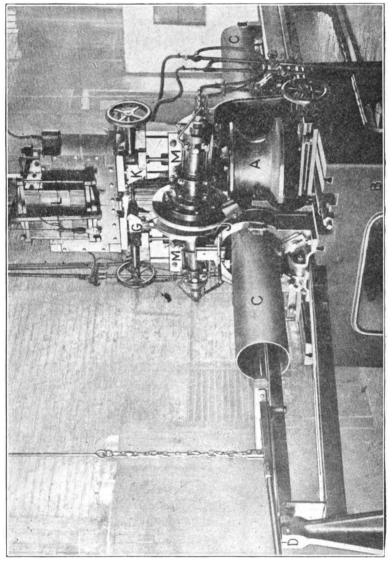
Electric Welding Machine for Cylinders with One Cylinder in Position
